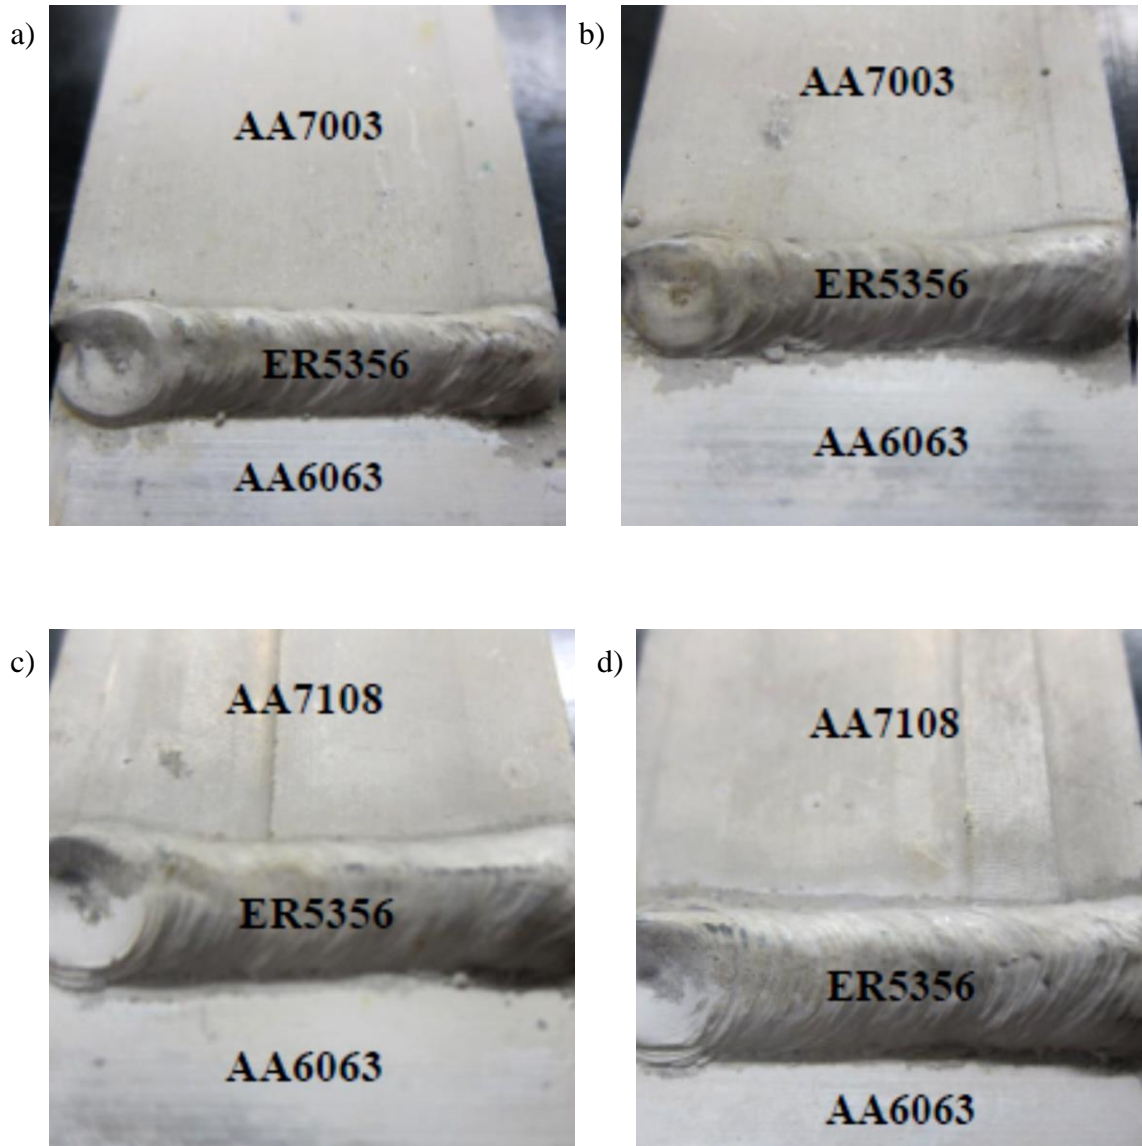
Photographs of lap-joint welded AA7003 (configurations A1 and A3) in (a) as-welded T6 condition, (b) as-welded T6+PB condition and lap-joint welded AA7108 (configurations C1 and C3) in (c) as-welded T6 condition, (d) as-welded T6+PB exposed to GMW-14872.
